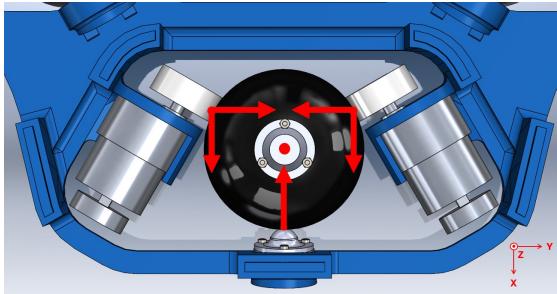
Constraints of a single ball drive mechanism, top view without roof
